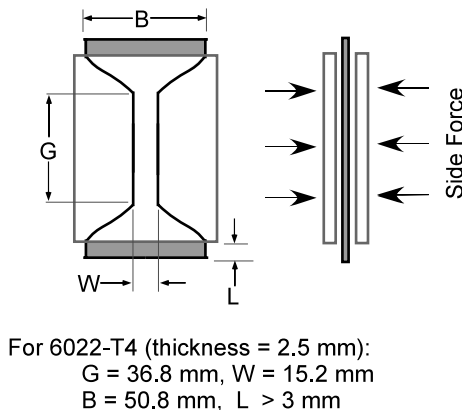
Schematic of the flat plate supports and final sample dimensions.
